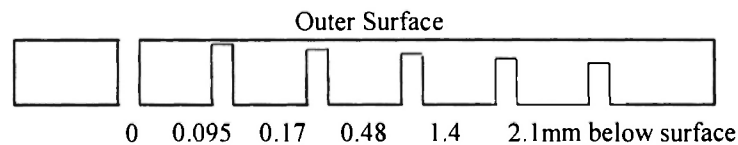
The cross-section of a calibration specimen containing drilled holes below the surface
